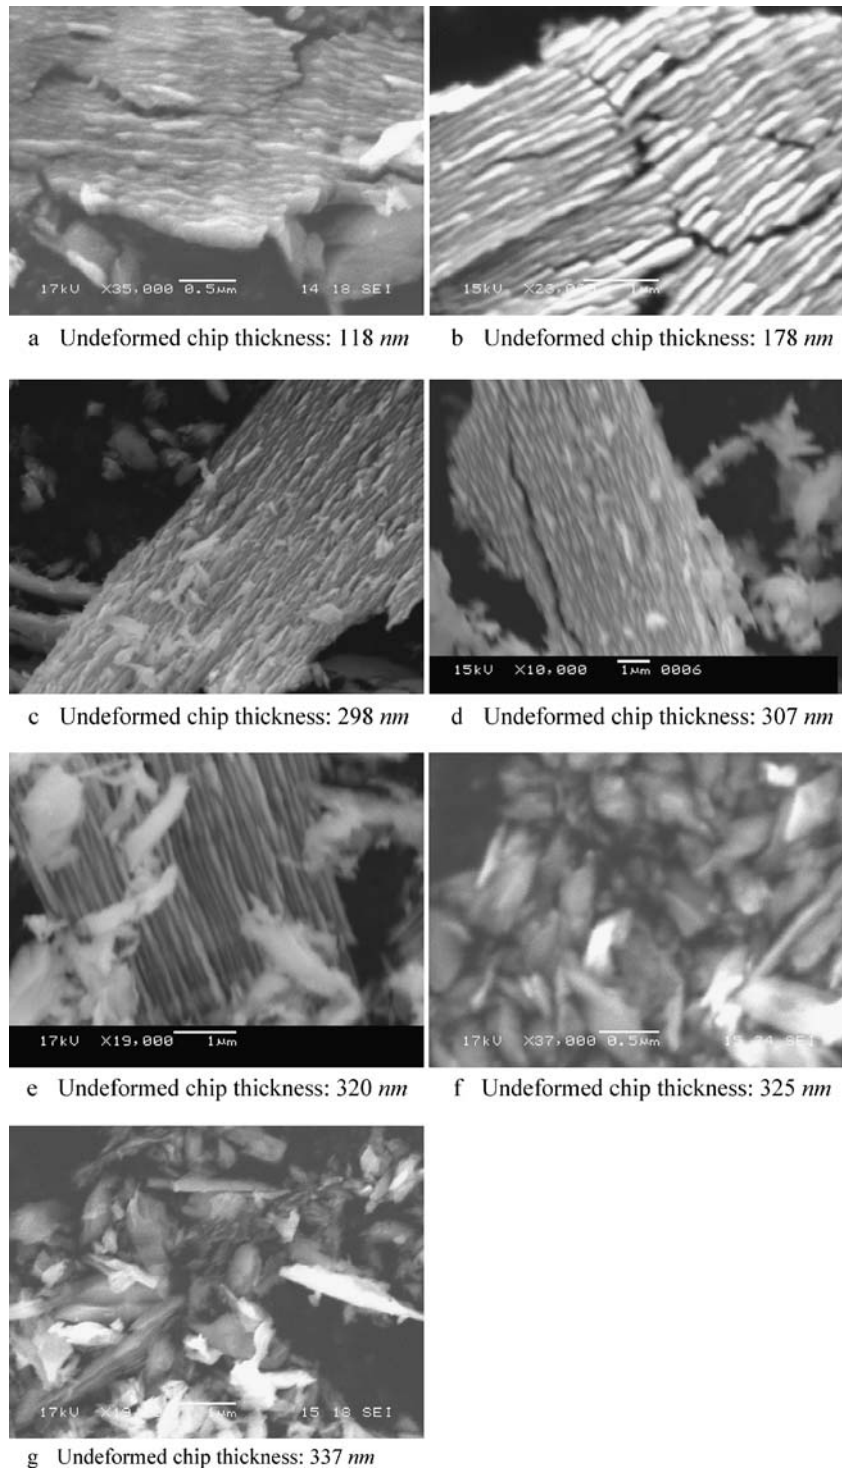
Chips formed at different undeformed chip thickness in cutting of Si wafer using diamond tool B (cutting edge radius, 335 nm)
